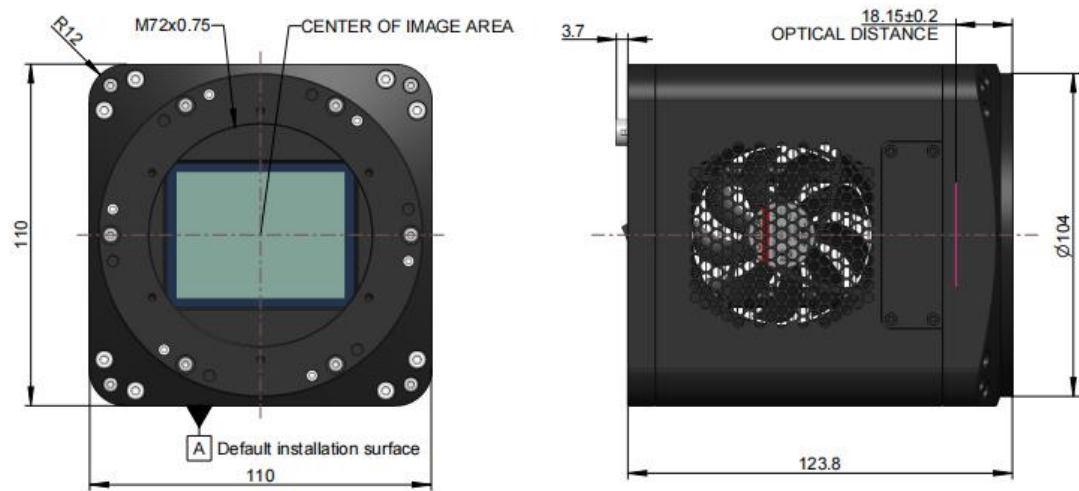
1 MAX251& MAX151 dimensions (mm)
